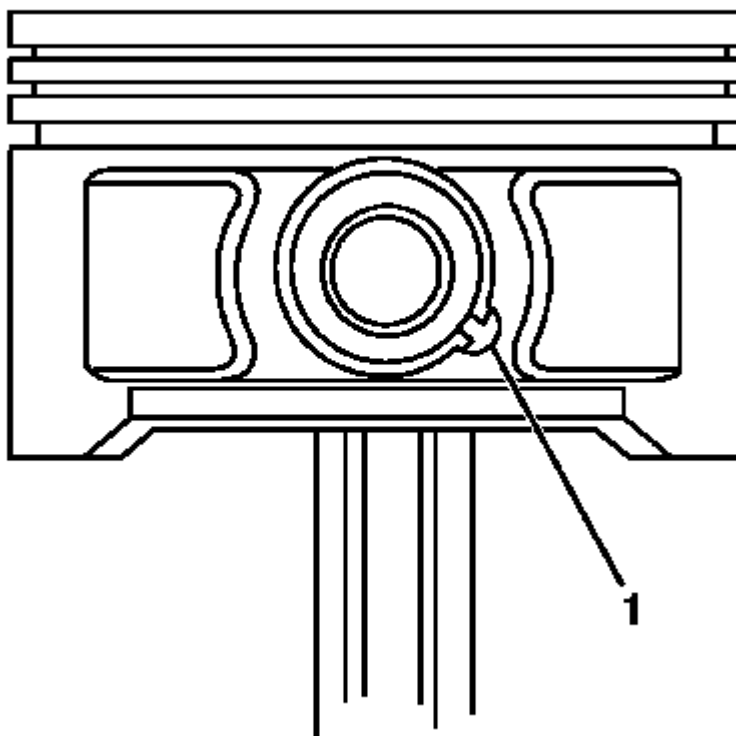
View Of Piston Pin Retaining Clip & Cutout Area Of Pin Bore
